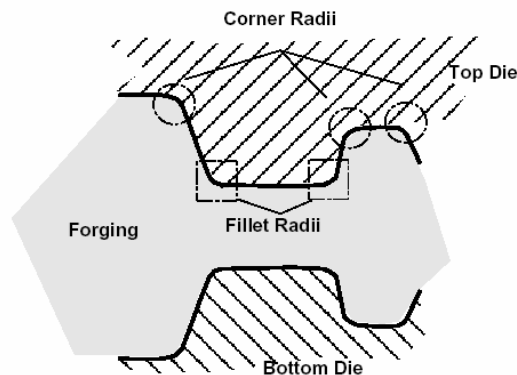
Illustration of Corner and Fillet Radii for a Part [26]
